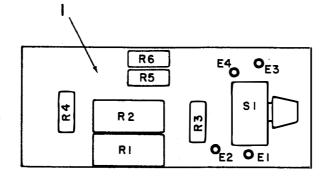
Lower Panel Control 791826 (1A10A2)
